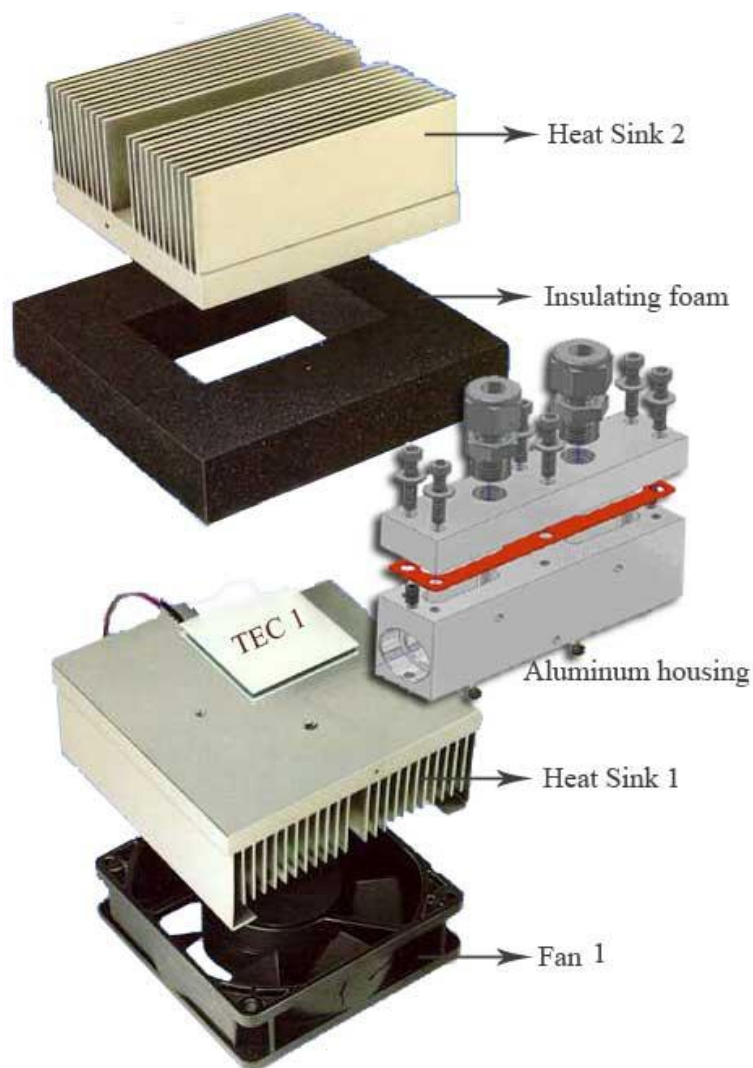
View of the solid-state chilling assembly around the two-stage thermal modulator aluminum housing.
